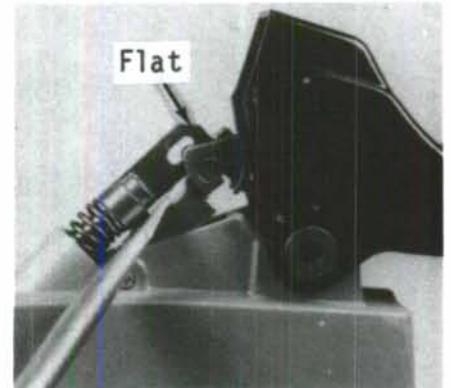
View of chain brake mechanism. Insert a screwdriver as shown, then turn screwdriver to release adjuster from latch. When assembling components, position adjuster so flat is up as shown.
